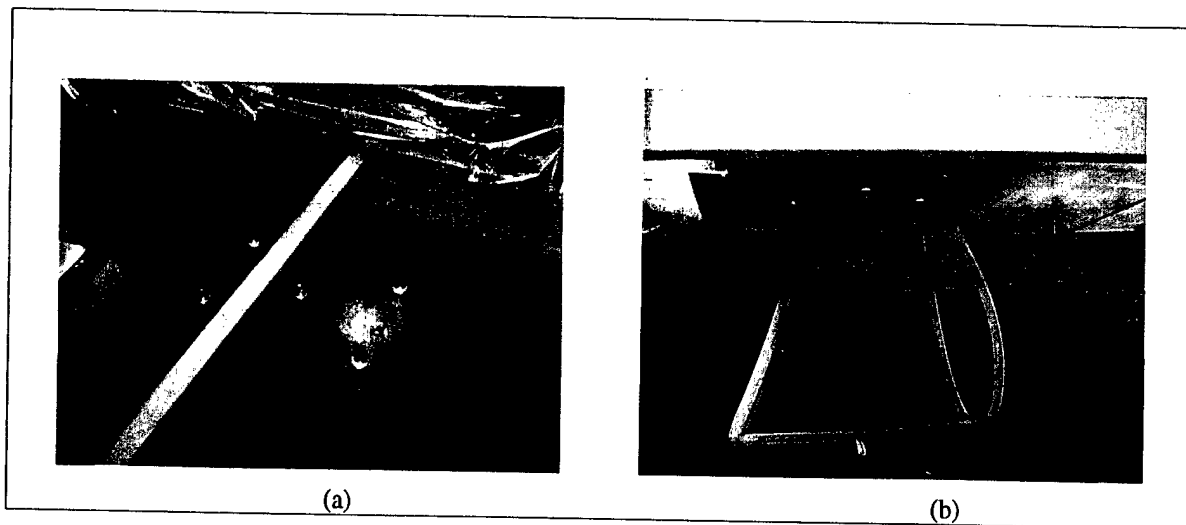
Vacuum distribution ports (a) top view (b) bottom view.
